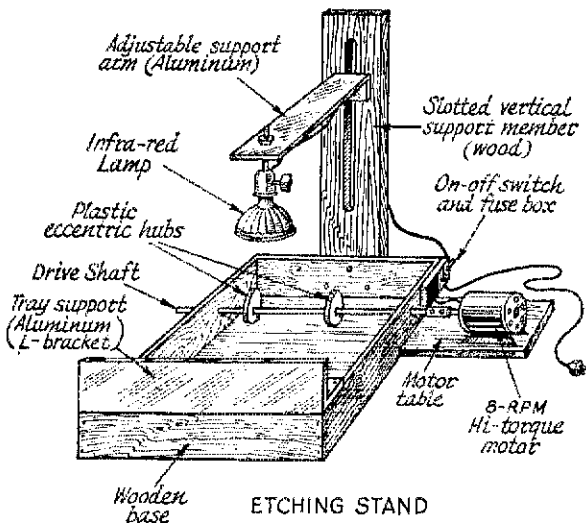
Details of a home-made etching stand which can be built at a moderate cost. The actual dimensions will have to be determined by the builder, based on the size tray he will use to contain the etchant bath. The solution tray is placed on the two eccentric hubs of the drive shaft, its rear end resting on the aluminum L bracket in the foreground. The hubs raise and lower the tray as the shaft turns, thus providing agitation of the solution. An infra-red lamp is supported by an arm which can be raised or lowered to a distance that maintains a 100-degree solution temperature. A wing nut and bolt secure the lamp arm to the vertical support member at the rear of the sketch. Almost any low r.p.m. motor will work, but an 8- or 10-rpm type is preferred.
